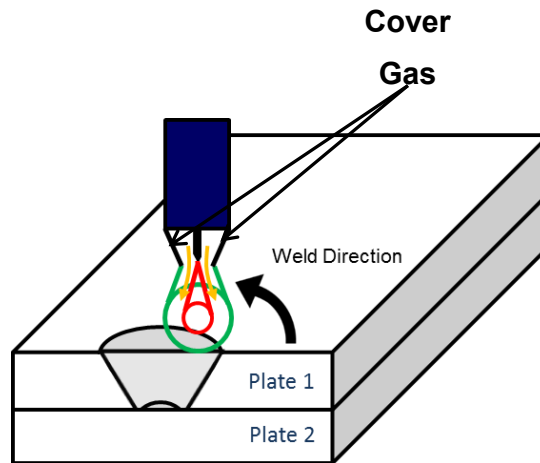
Schematic of TIG welding process. All samples were welded through a 45° countersunk hole in order to have full penetration through both plates.
